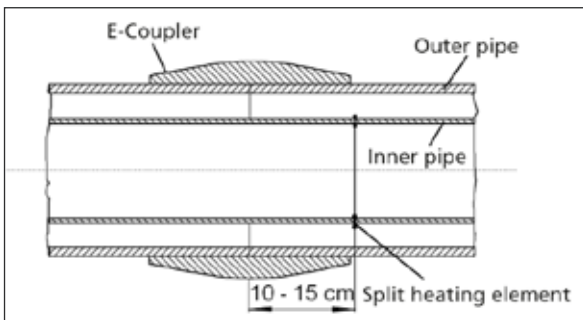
Cascade welding inner pipe with butt welding-Outer pipe with electrofusion welding
